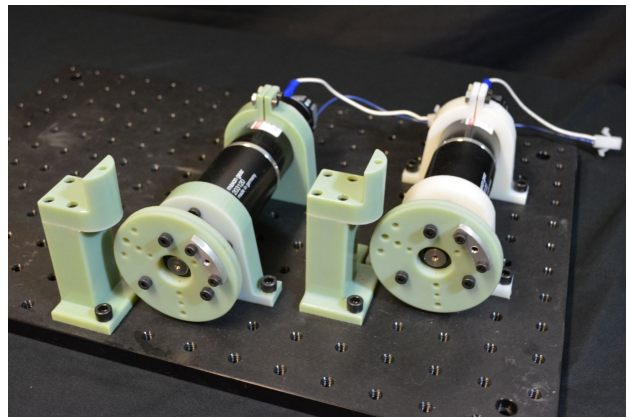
The off-board RUD motors with 3D printed components and a laser cut metal piece with post-machining. Using 3D printing enabled custom components that were developed in-house. The metal component is screwed into the 3D printed motor pulleys, which have inserts for the mating screws. The aluminum piece contains a threaded hole for a set screw.
